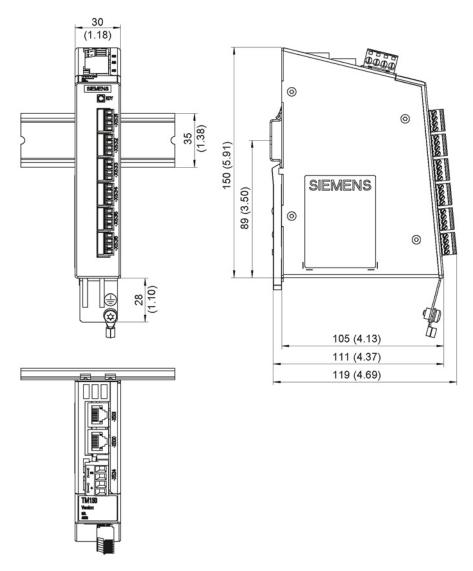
Dimension drawing of Terminal Module TM150, all data in mm and (inches)
